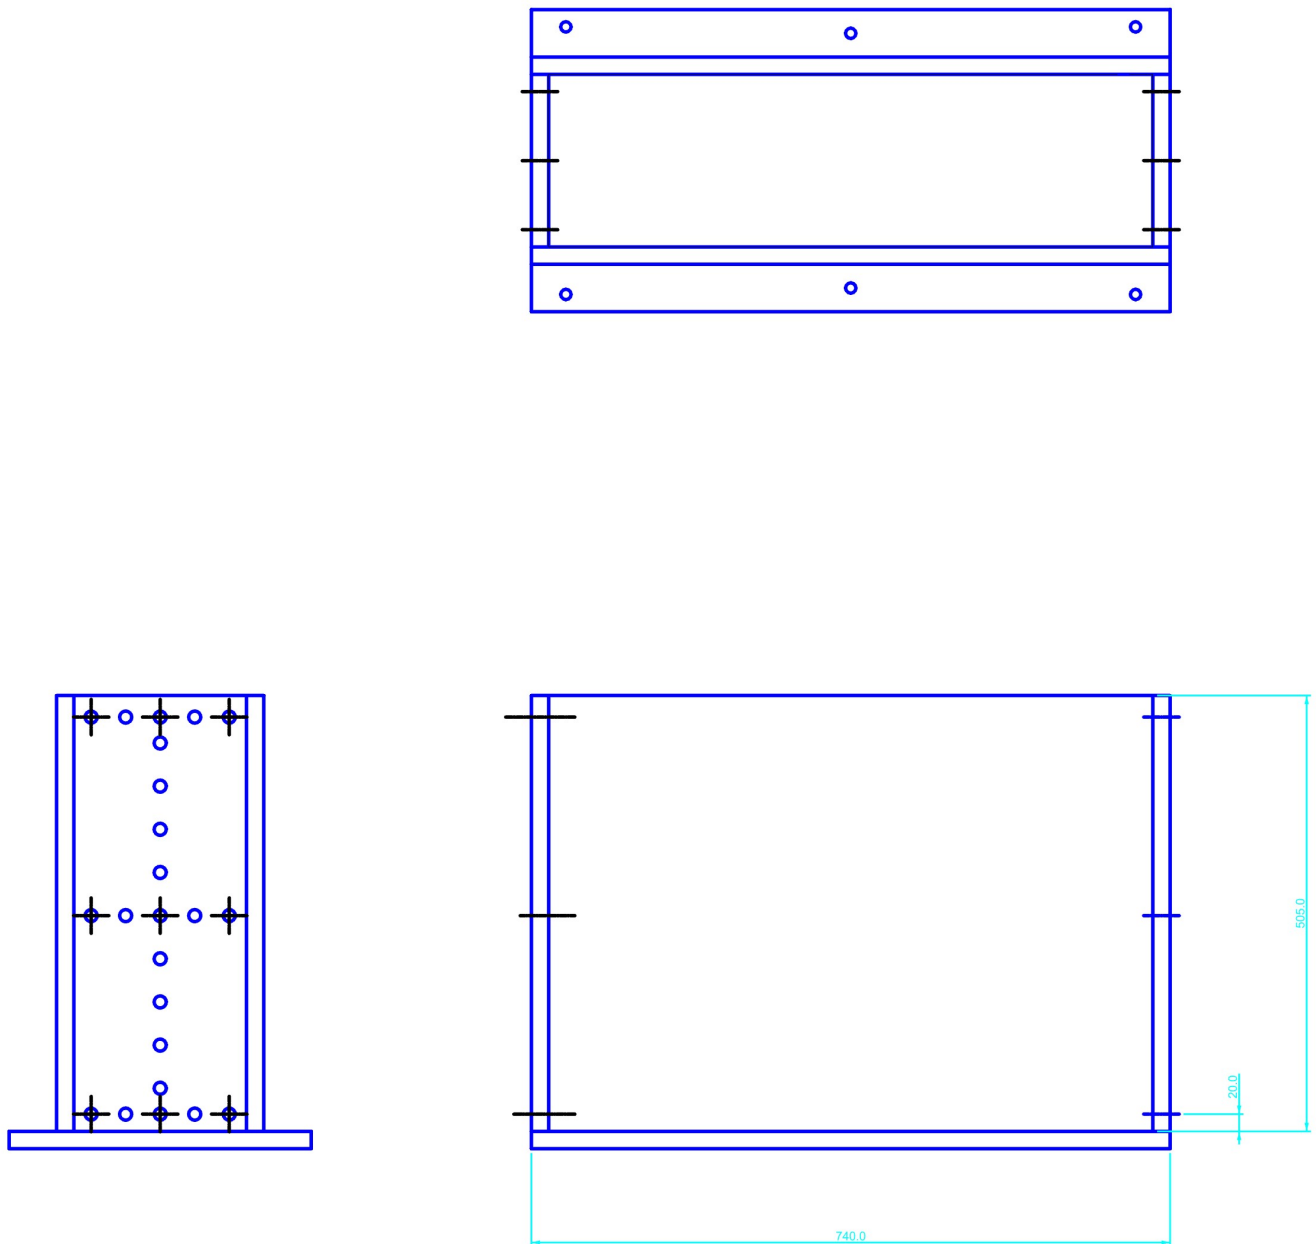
Tank dimensions; The tank that is used for the experiments is the designated tank of the sloshing rig. This tank is made of 20[mm] acrylic. In the tank, sensor openings are present that were used in previous experiments. These openings are now closed with blind bolts. 9 of those openings, marked in the drawing are used to secure the overhang construction to the tank.
